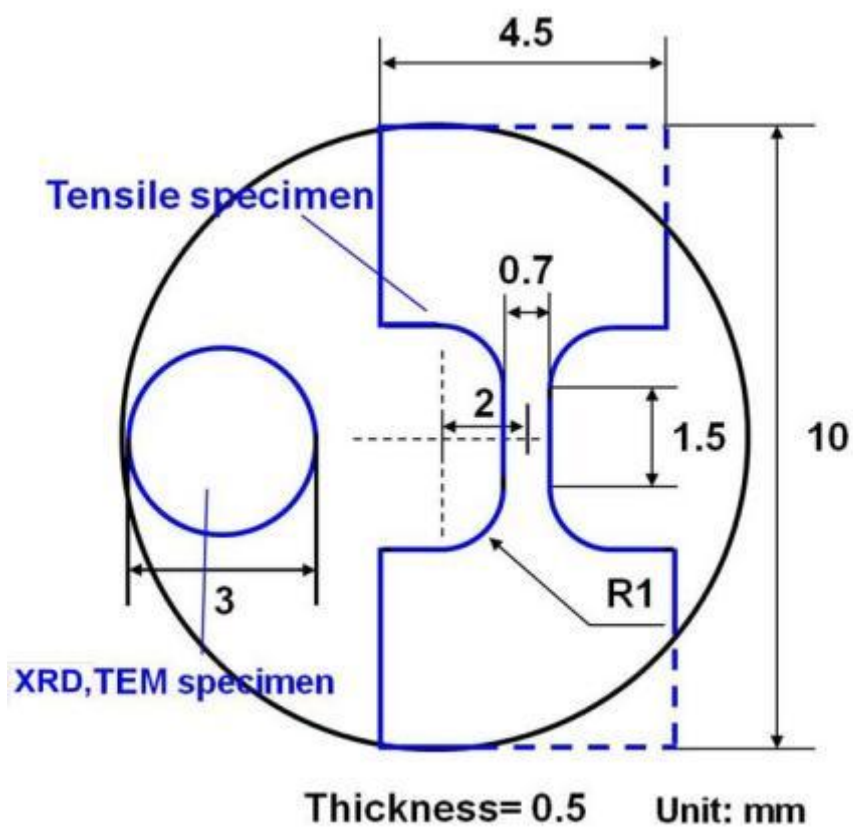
Dimensions of tensile and TEM specimens extracted from HPT disk.
